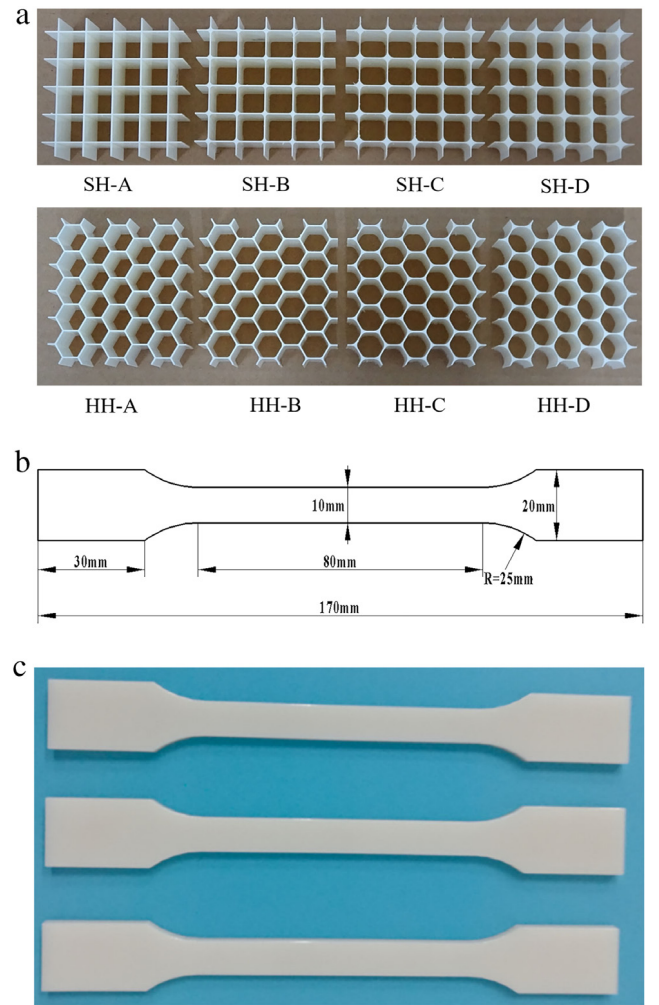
(a) 3D printed square and hexagonal honeycomb samples; (b) Geometric dimensions of dog-bone shaped samples; (c) 3D printed dog-bone shaped samples for experimental tests.
